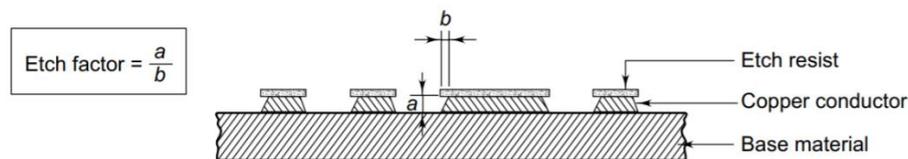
Under-etching defect and etch factor (Source: Printed circuit boards: design, fabrication, assembly and testing (2005), page 381)
